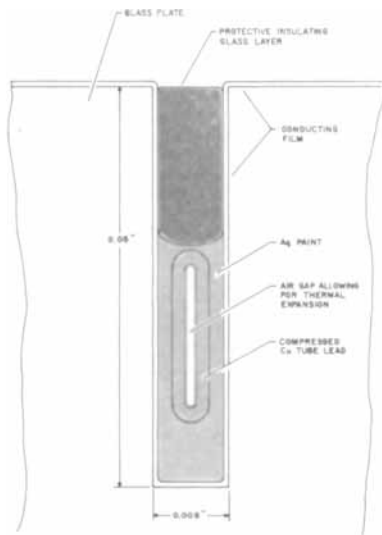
Schematic cross-sectional drawing of groove, contacting lead, and protective layer.
